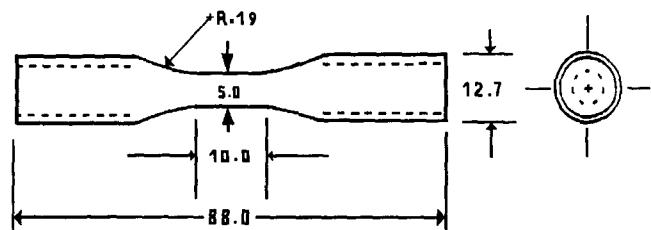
Geometry of fatigue specimens. Dimensions are in millimeters.
